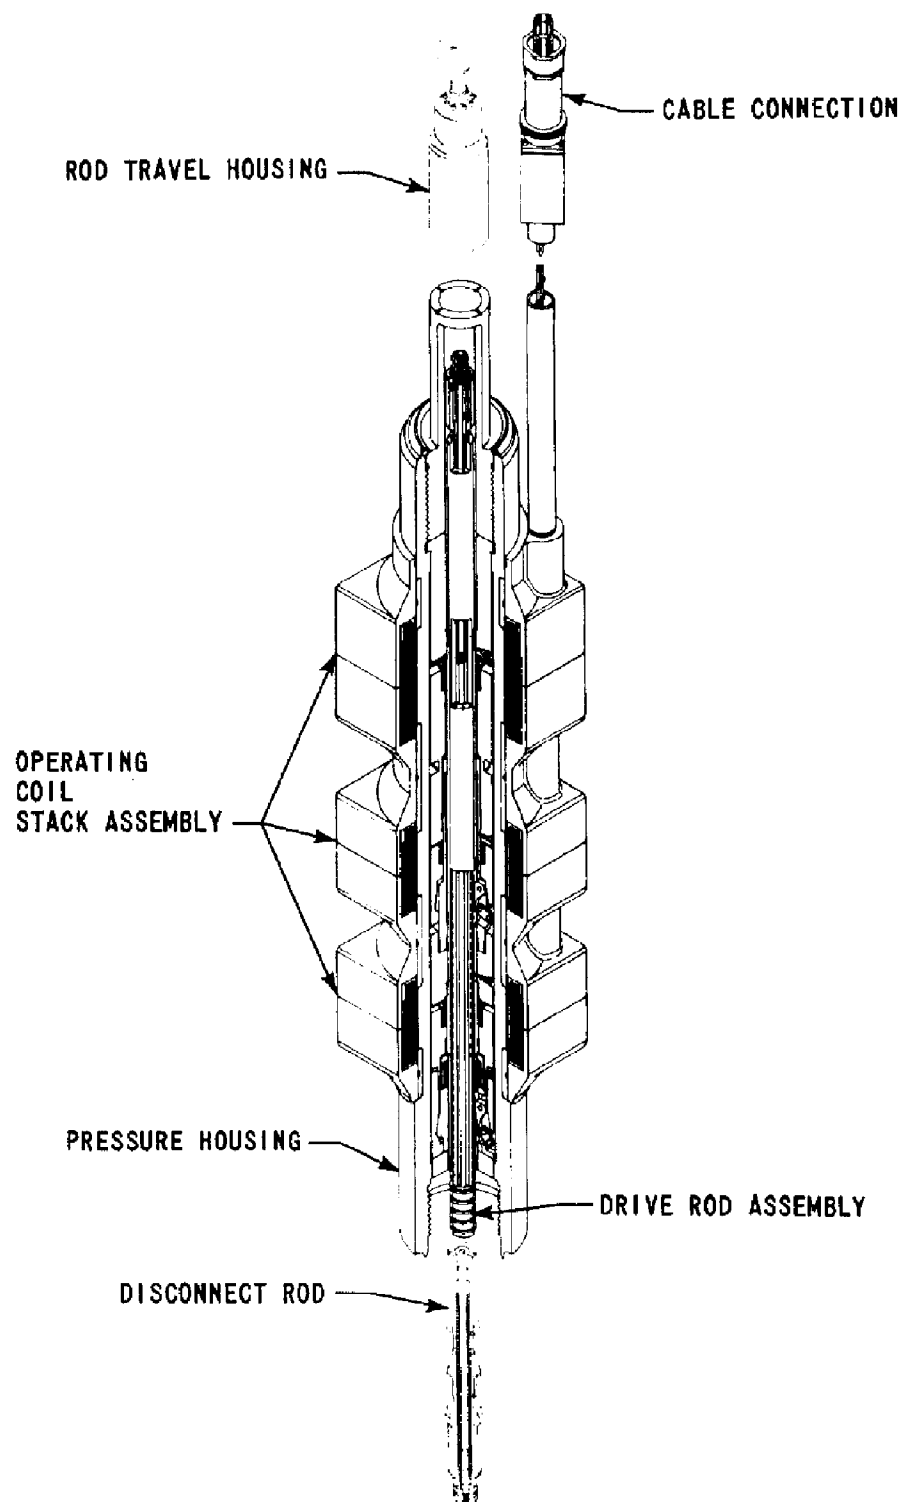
Full Length Control Rod Drive Mechanism Schematic
